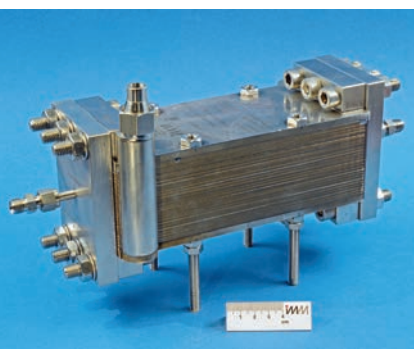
Laser welded reactor comprising roll embossed plates
